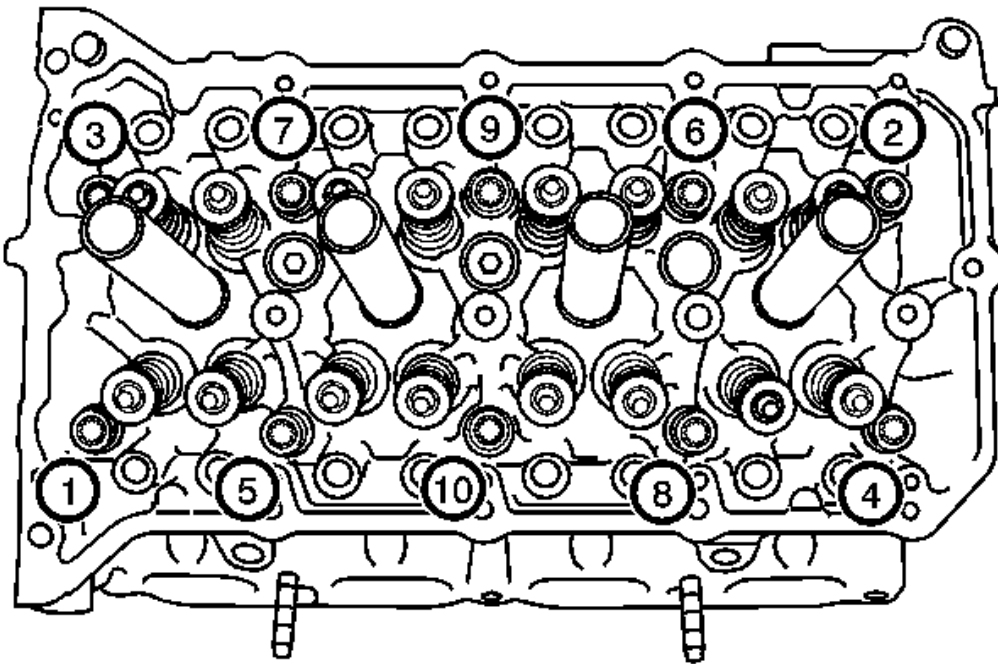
Identifying Cylinder Head Bolt Loosening Sequence
